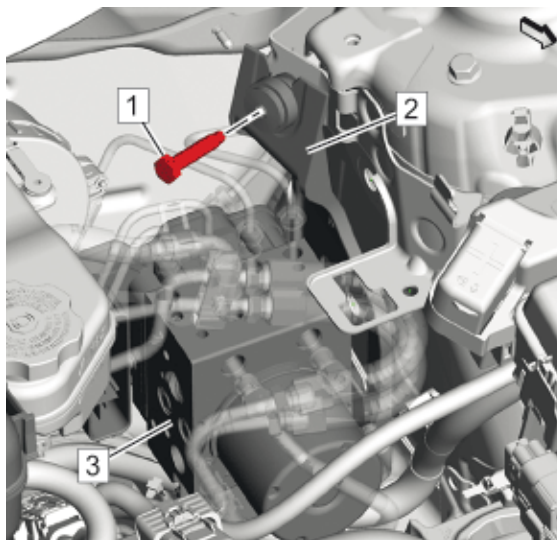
Brake Pressure Modulator Valve, Bracket And Bolt
